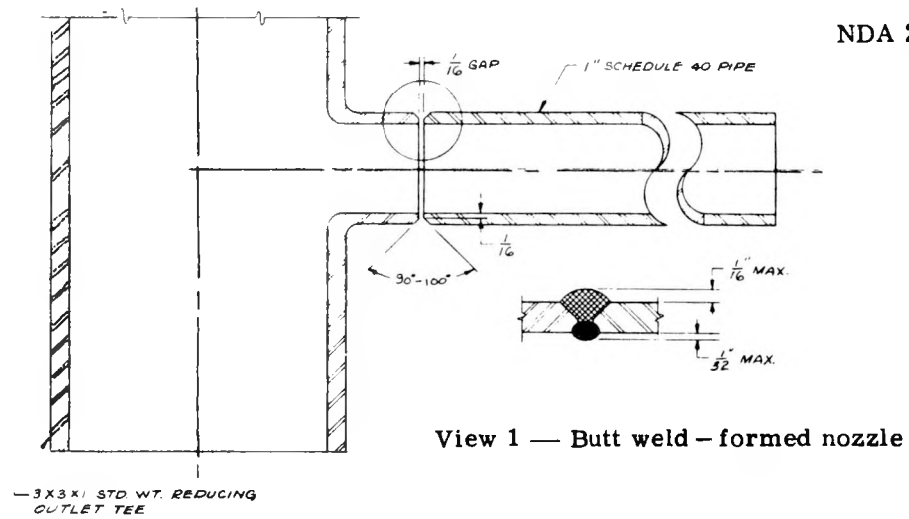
Welds for pigtail-fuel tube and pigtail-header connections. All dimensions in inches. All material 316 SS.
